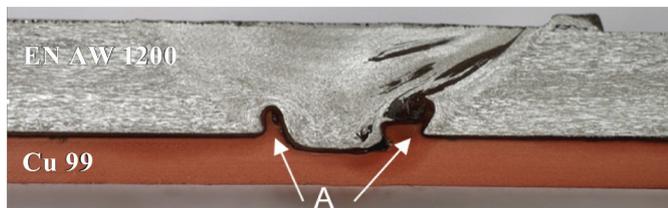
Macroscopic analyze of FSW weld EN AW1200 - Cu 99.
